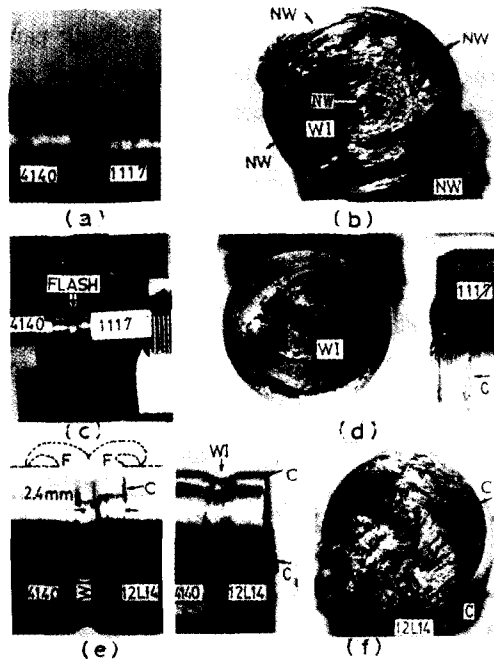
Typical appearance and fractured surfaces of welded joints:
